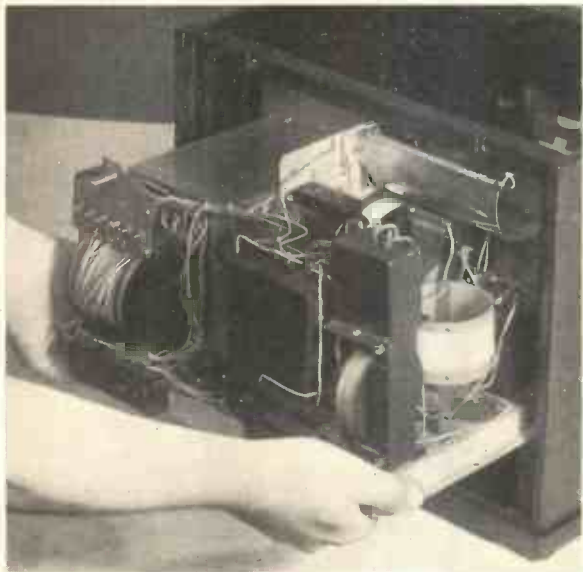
How to Withdraw the Chassis of the Columbia 307 Receiver.
